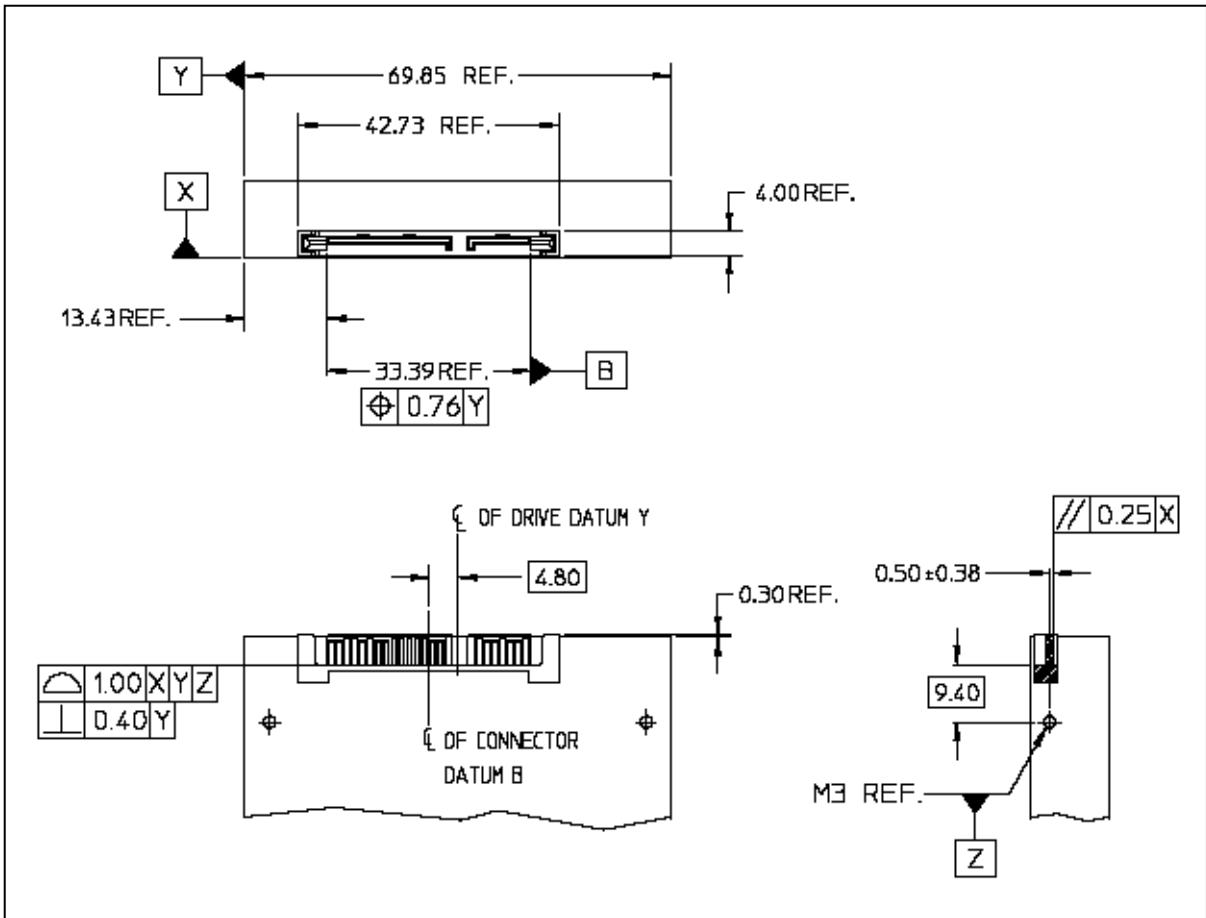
Device Plug Connector Location on 2.5” Side Mounted Device
